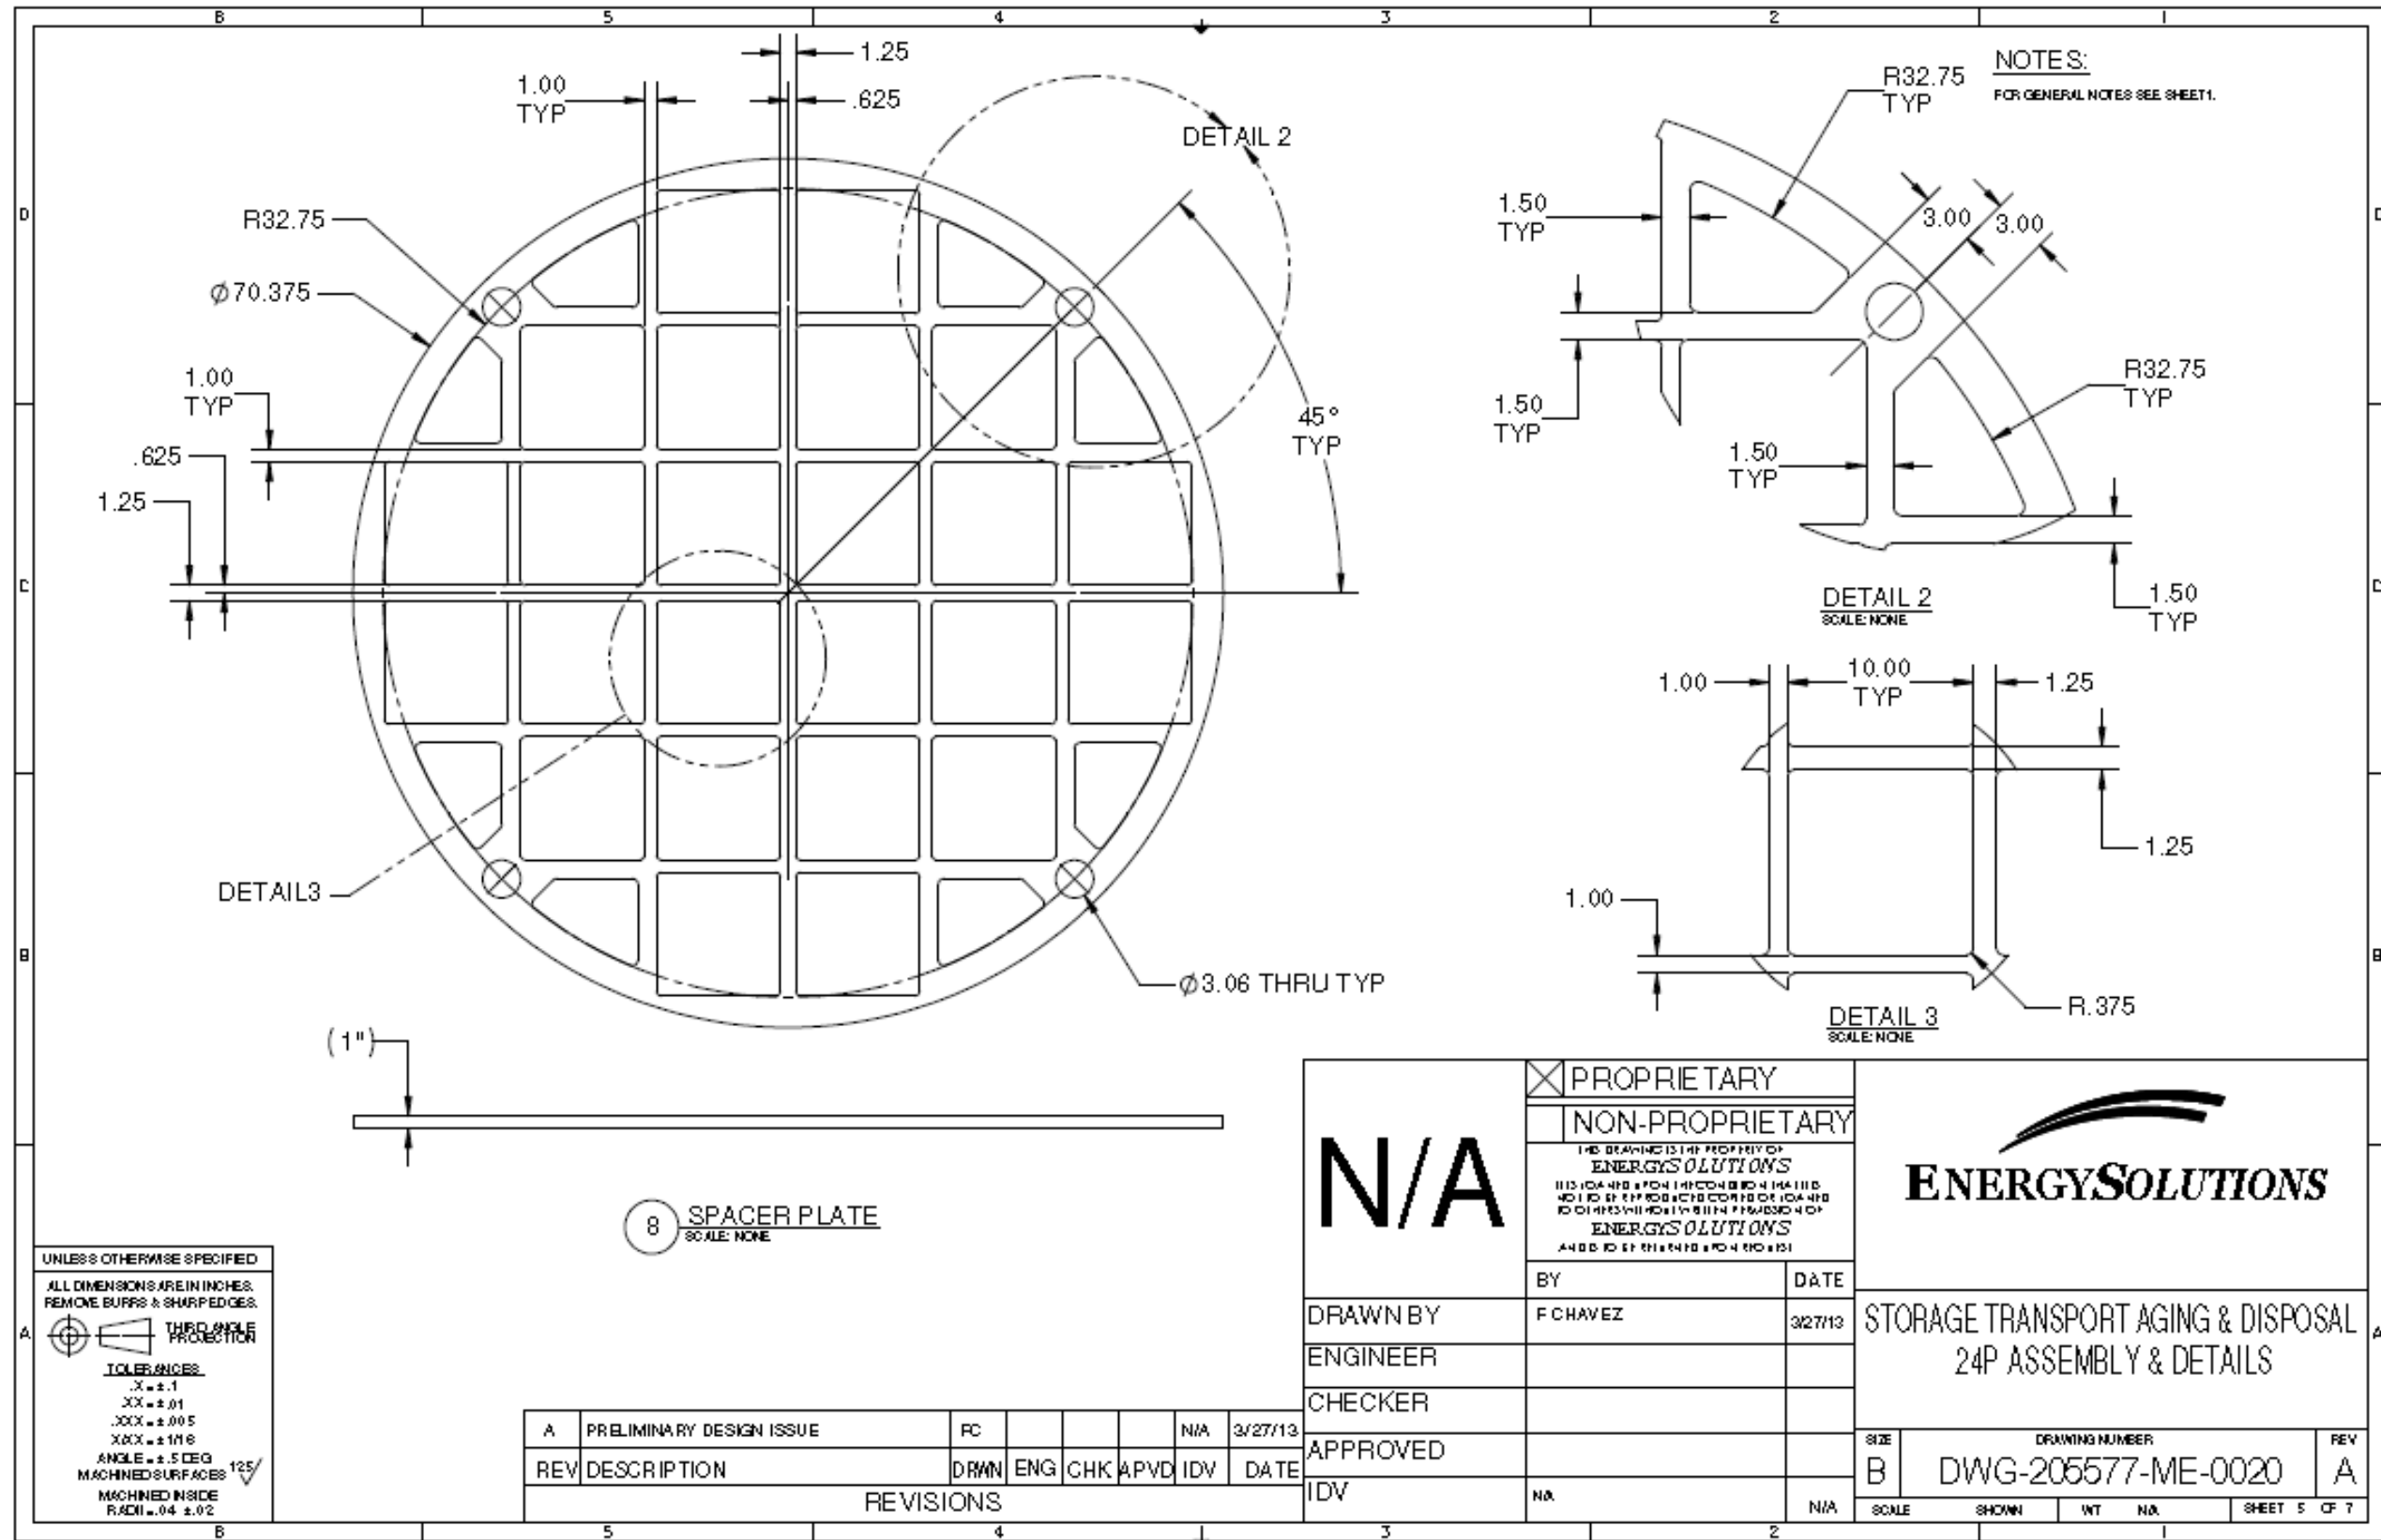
Standardized Transport, Aging and Disposal Canister - 24 PWR Assemblies - Assembly & Details – Sheet 6 of 7
